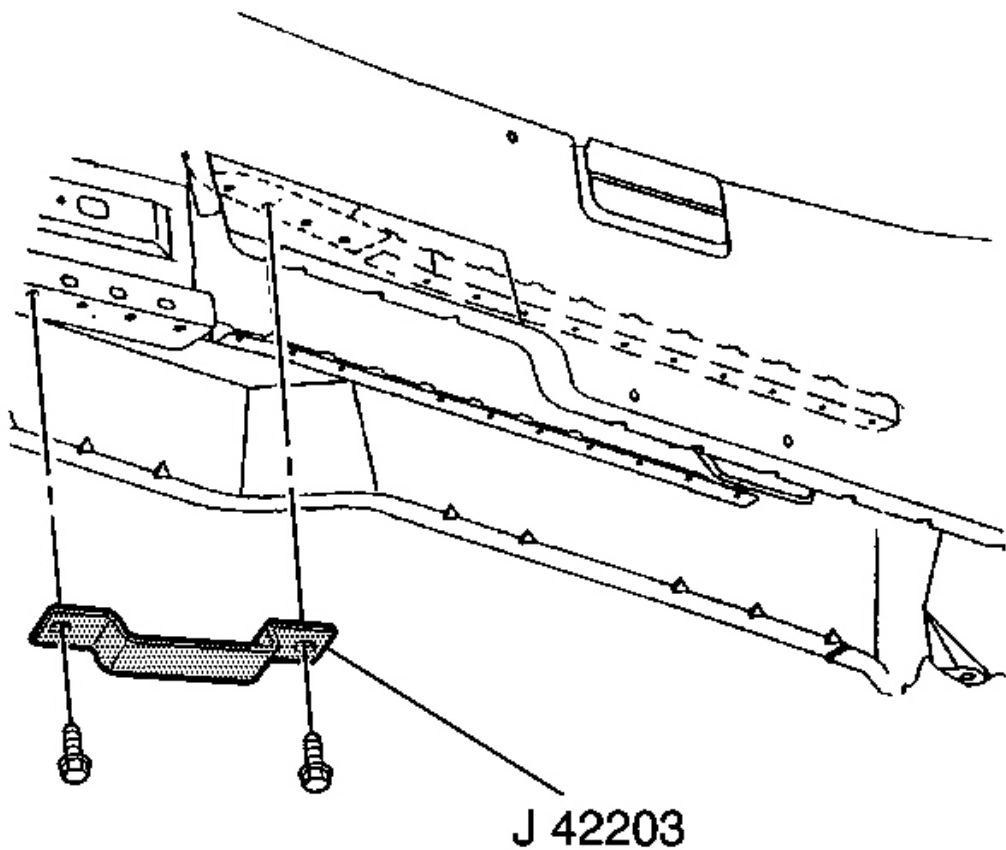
J 42203, Close-Out Panel Flange & Bolts
